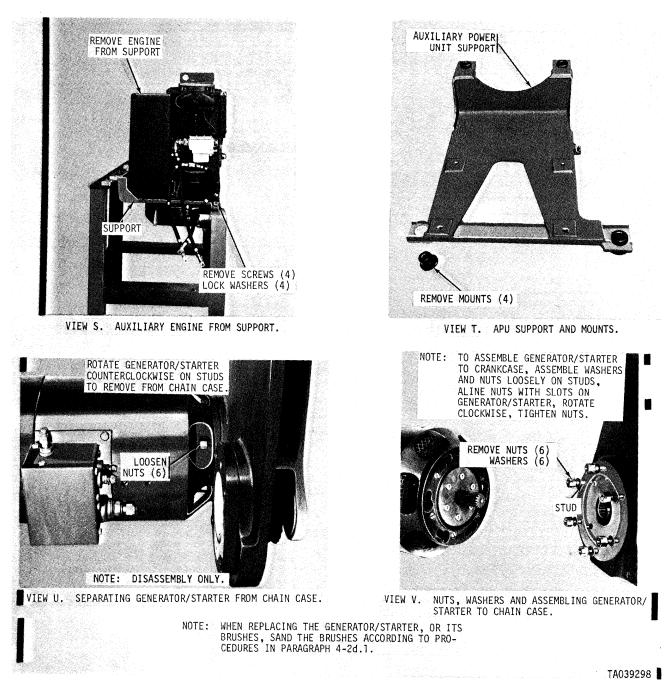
Auxiliary power unit-disassembly and assembly (Sheet 5 of 6).
